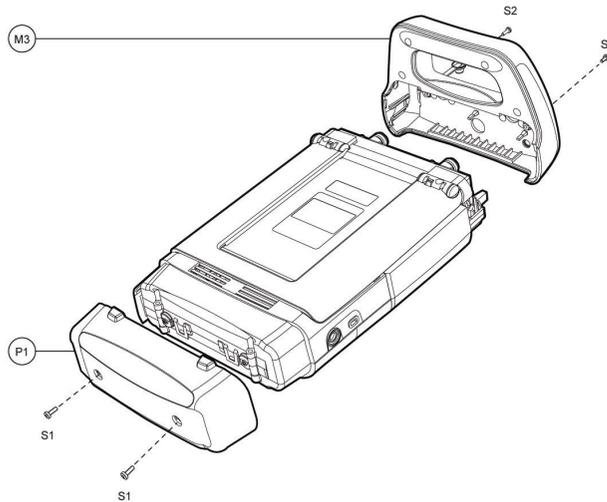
Removing BOTTOM HOLSTER and TOP HOLSTER
